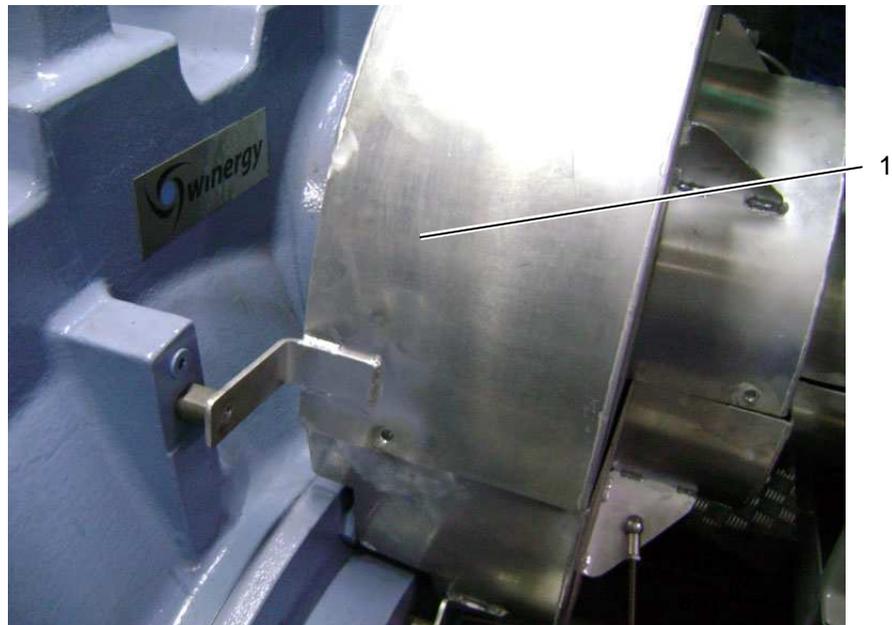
1 Cover of the rotor holding brake
